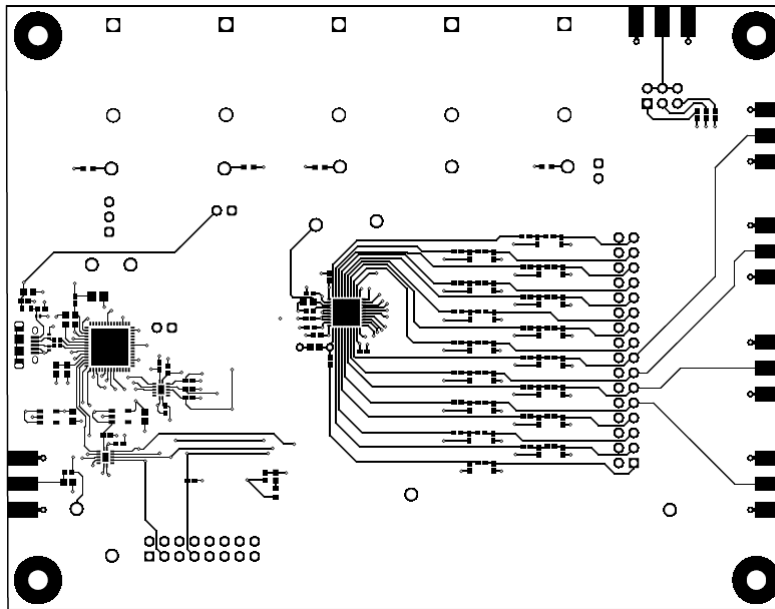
DAC81416-08EVM PCB Top Layer Layout
